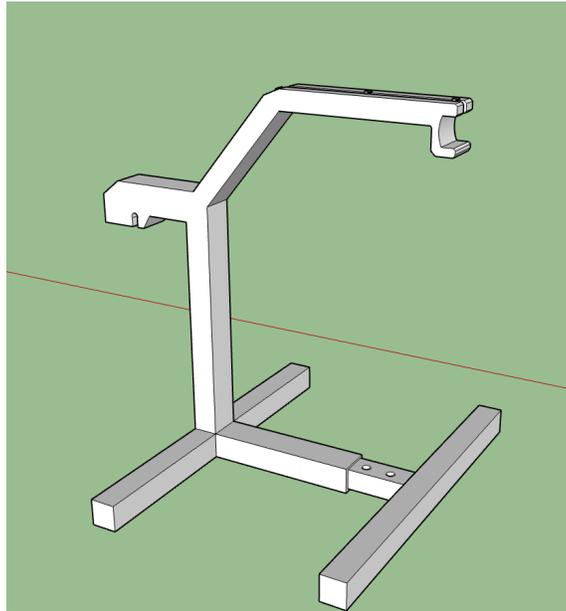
Prototype concept 3 with adjustable distance arm and raise handlebar holder
